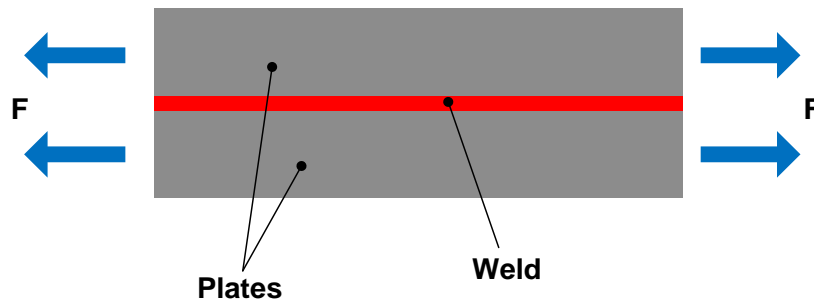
Schematic of Global Mechanical Tensioning technique on butt welded plates
